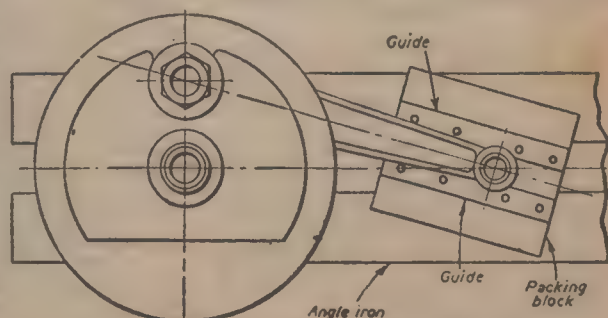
Checking the big-end at the position of maximum wear (vice and indicator not shown).
